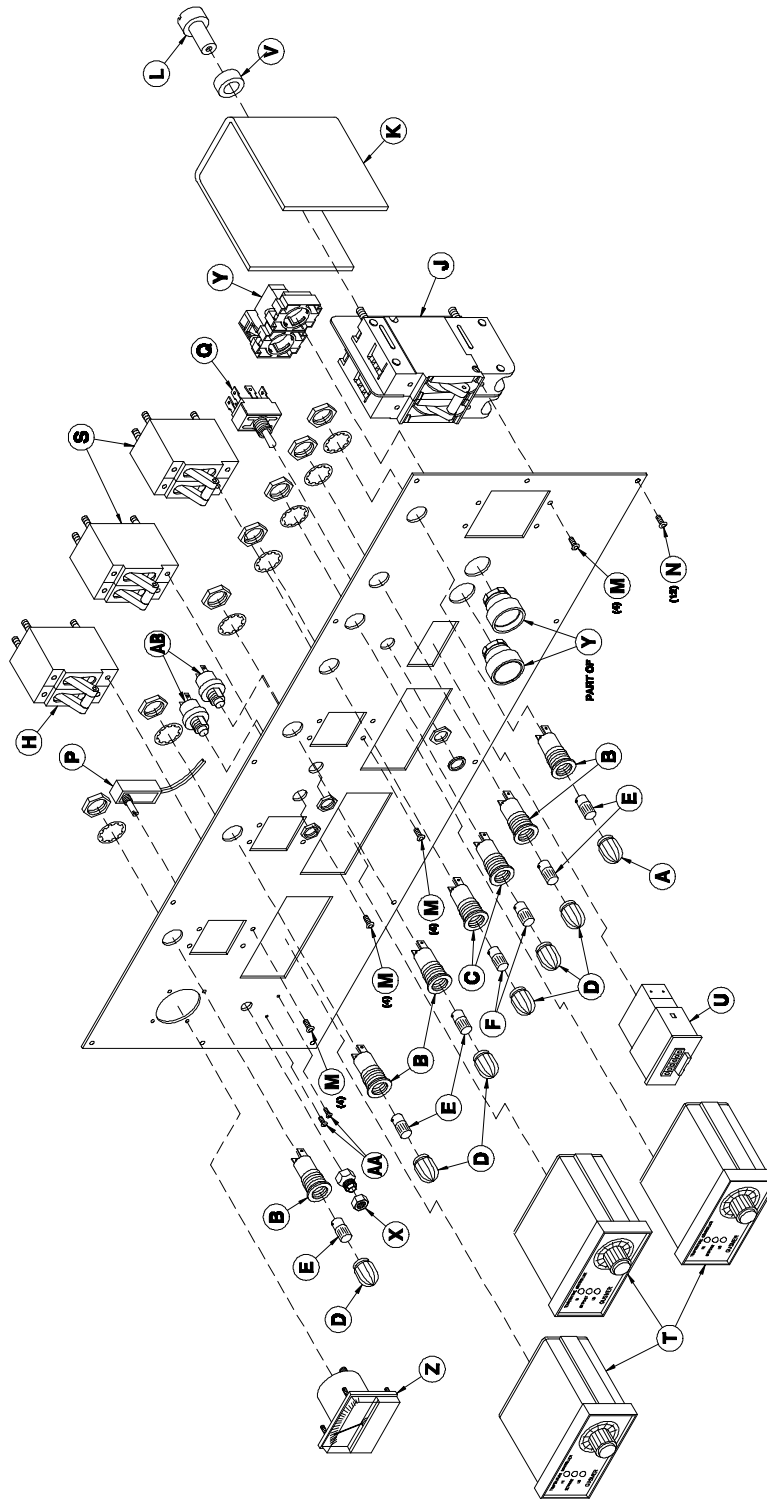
Electric Console (STANDARD) Exploded View sheet 1 of 2
